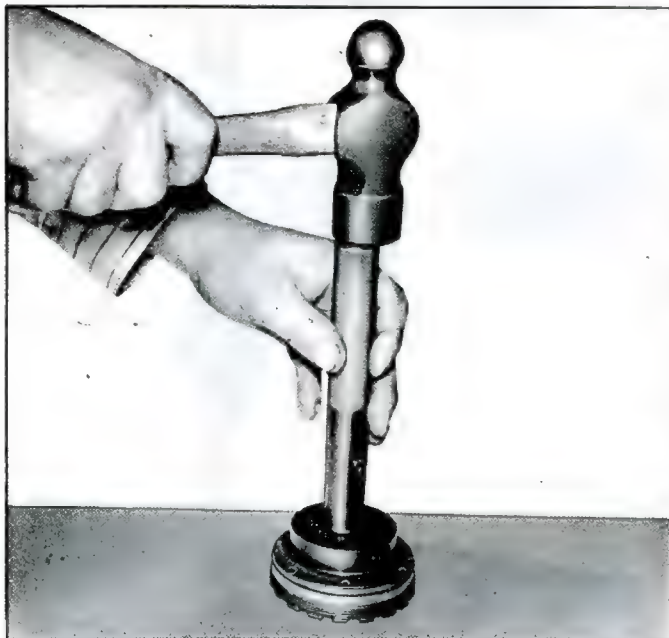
Installing Bearing Race in Pinion Adjusting Sleeve with J-7137 Driver and J-7079-2 Handle
